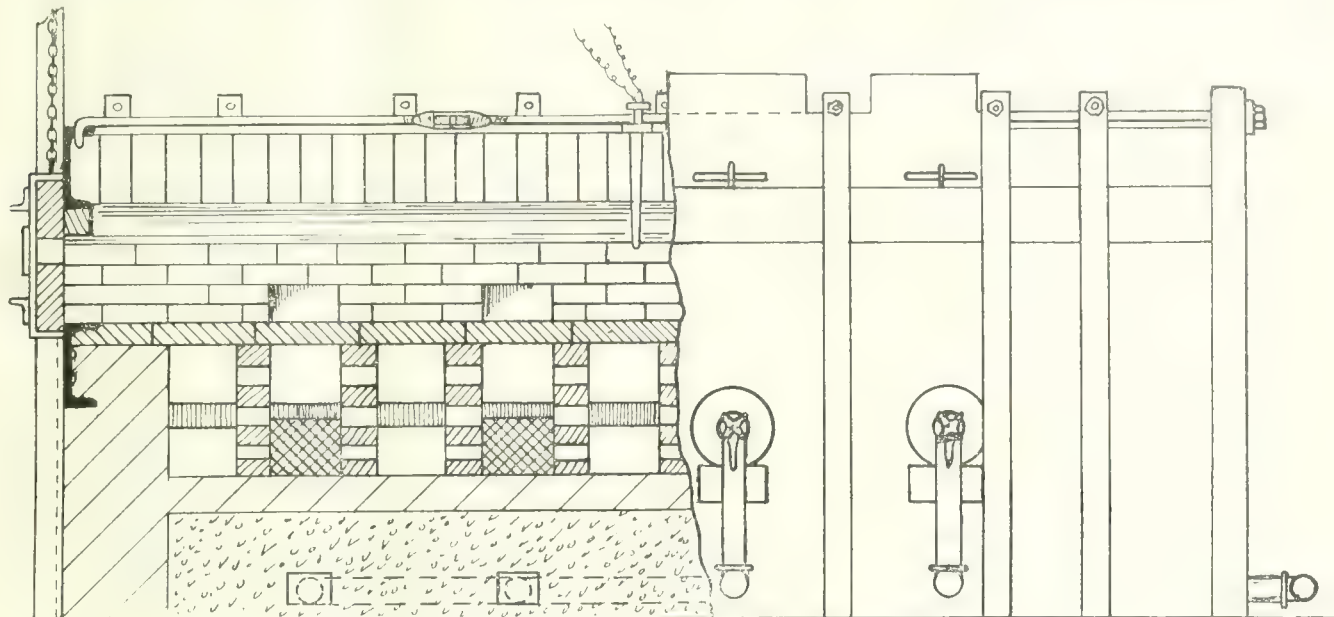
PART SECTION AND ELEVATION SHOWING PERFORATED SUPPORTING WALLS UNDER HEARTH.
